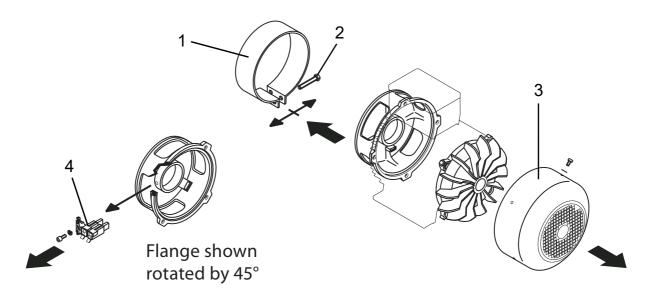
Preparatory disassembly for assembling single-bearing brush generators
